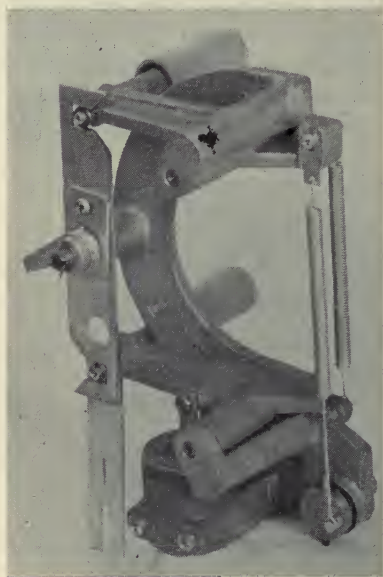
Filter-roller assembly showing damping device attached to lower roller arm and locking lever which is actuated by the lower sprocket pad roller. Spring at right determines film tension in filtered path and that at left is anchored on cam for synchronization adjustment.
